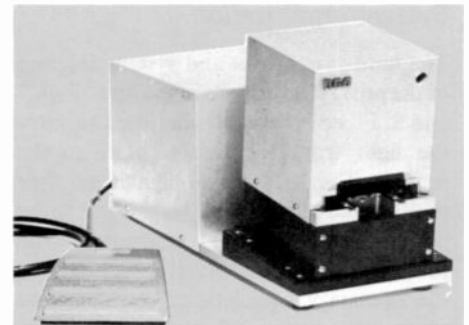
Photograph showing the mechanical fixture (small box) next to the electronic package.
